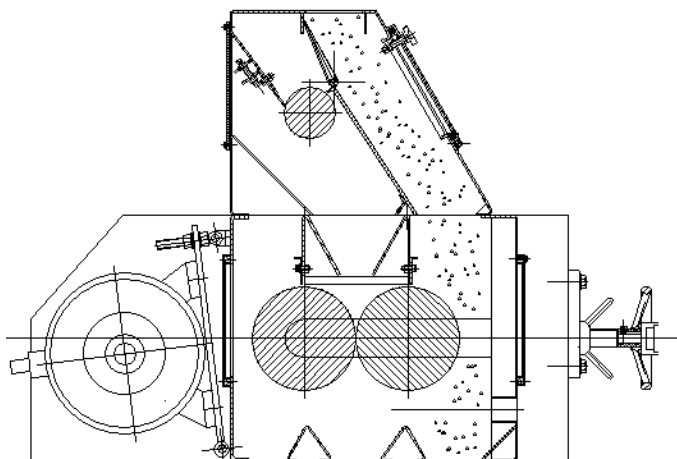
ROLLER CRUMBLER OVERALL DRAWING 2
